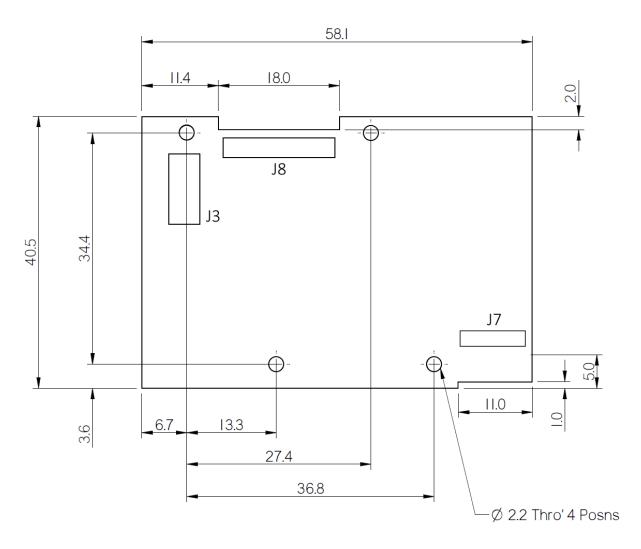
Mechanical overview of the Harrier IP Camera Interface Board; dimensions in mm. (Note – when mounted on a camera, this side usually faces away from the camera)
